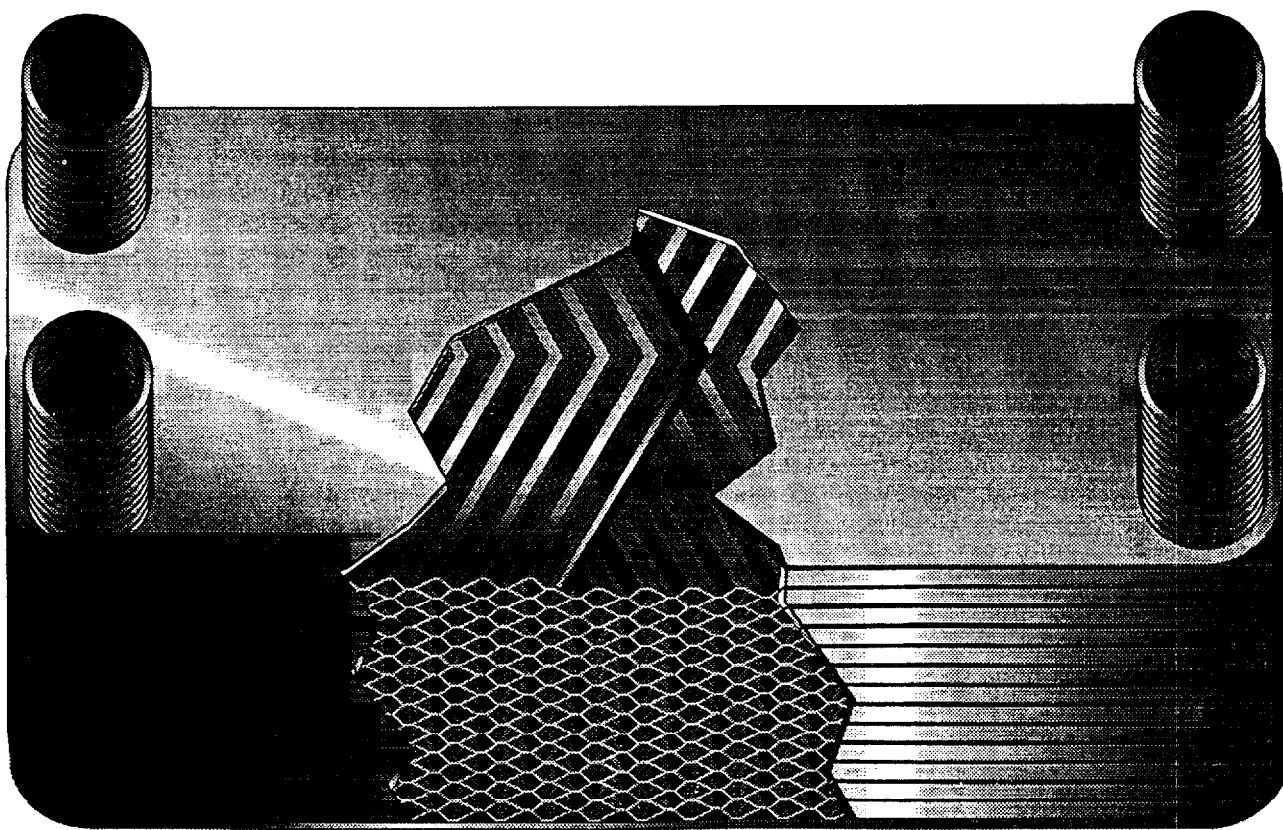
Cutaway of typical compact brazed plate heat exchanger.
